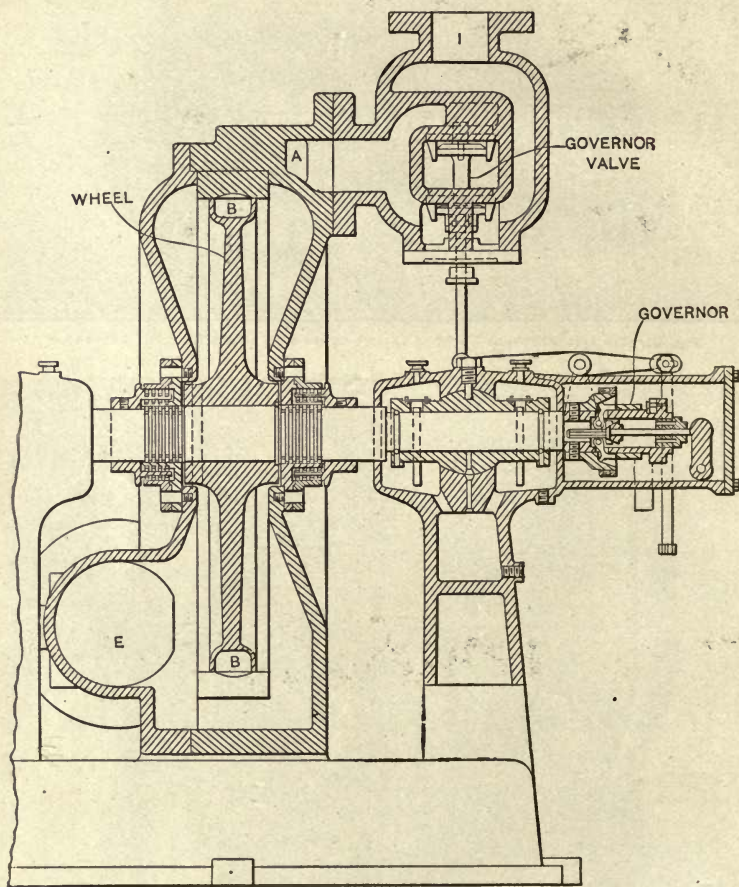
Sturtevant Steam Turbine Driving a Gas Blower
